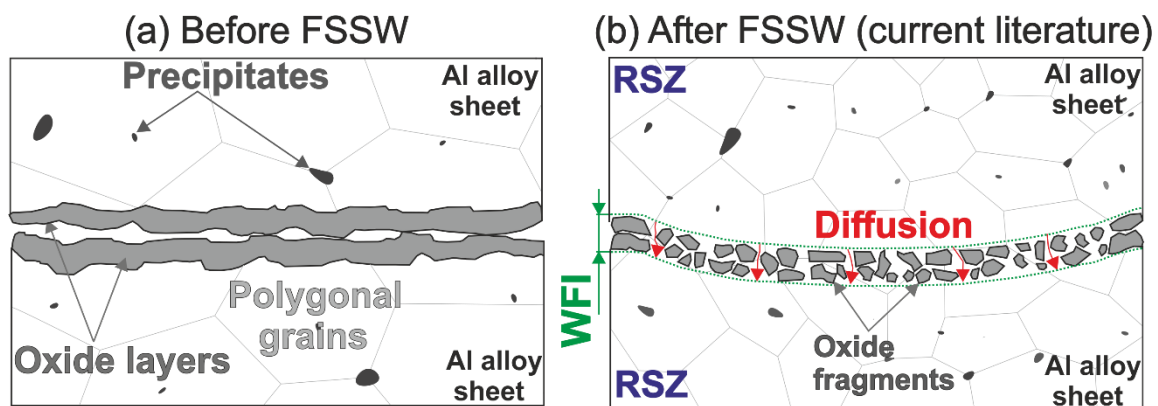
Extant literature illustrating the role of surface oxidation during friction stir spot welding (a) Interfacial thin oxide layer at the interface of the sheets before the welding and (b) interrupted diffusion bonding due to the smaller oxide fragments (WFI-weld faying interface; RSZ- recrystallised stir zone) being harder and brittle than the pristine workpiece material
